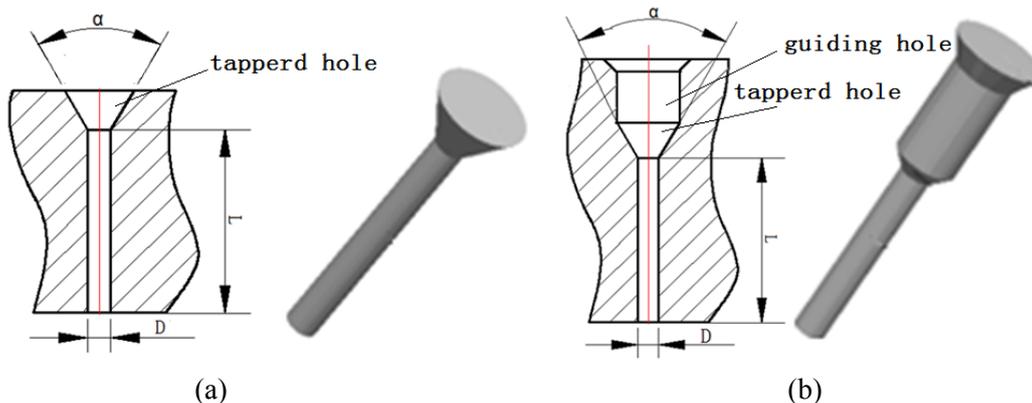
Geometry model of the spinneret orifices. (a) W/O guiding hole; (b) With guiding hole.
